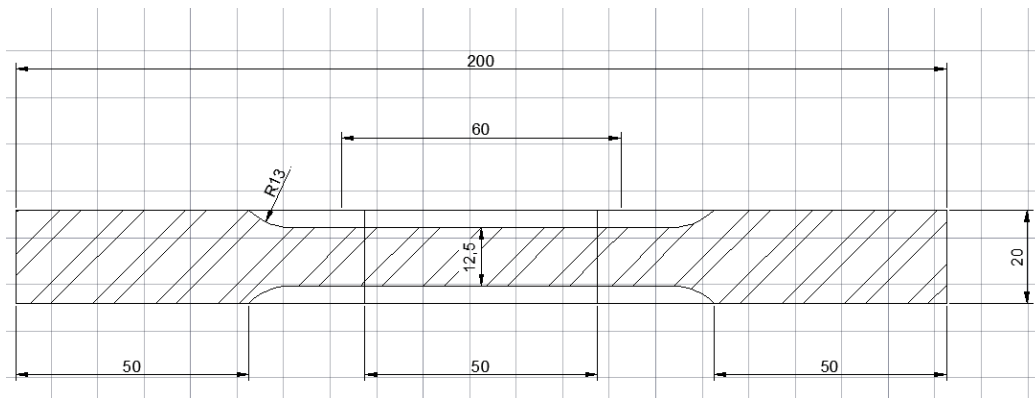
Steel sheet coupon sample (dimensions in mm)
